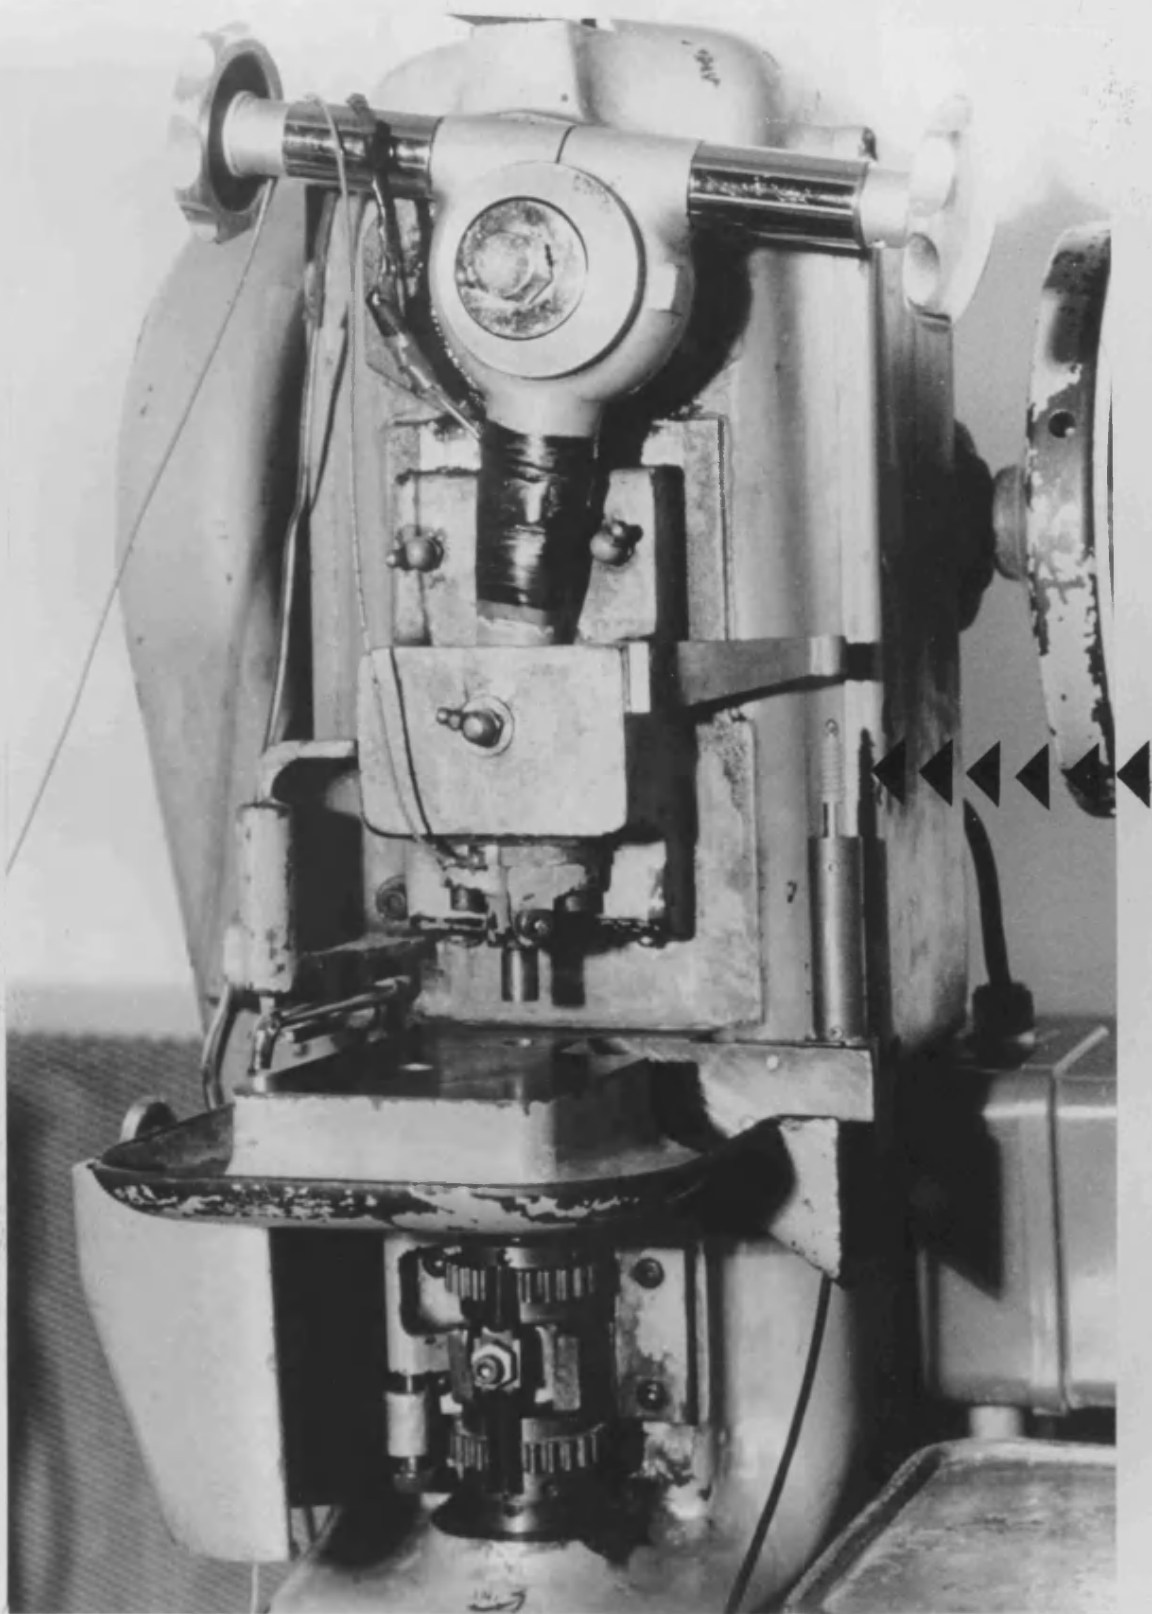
Close-up of the tabletting machine showing the position of the LVDT on the die table.
